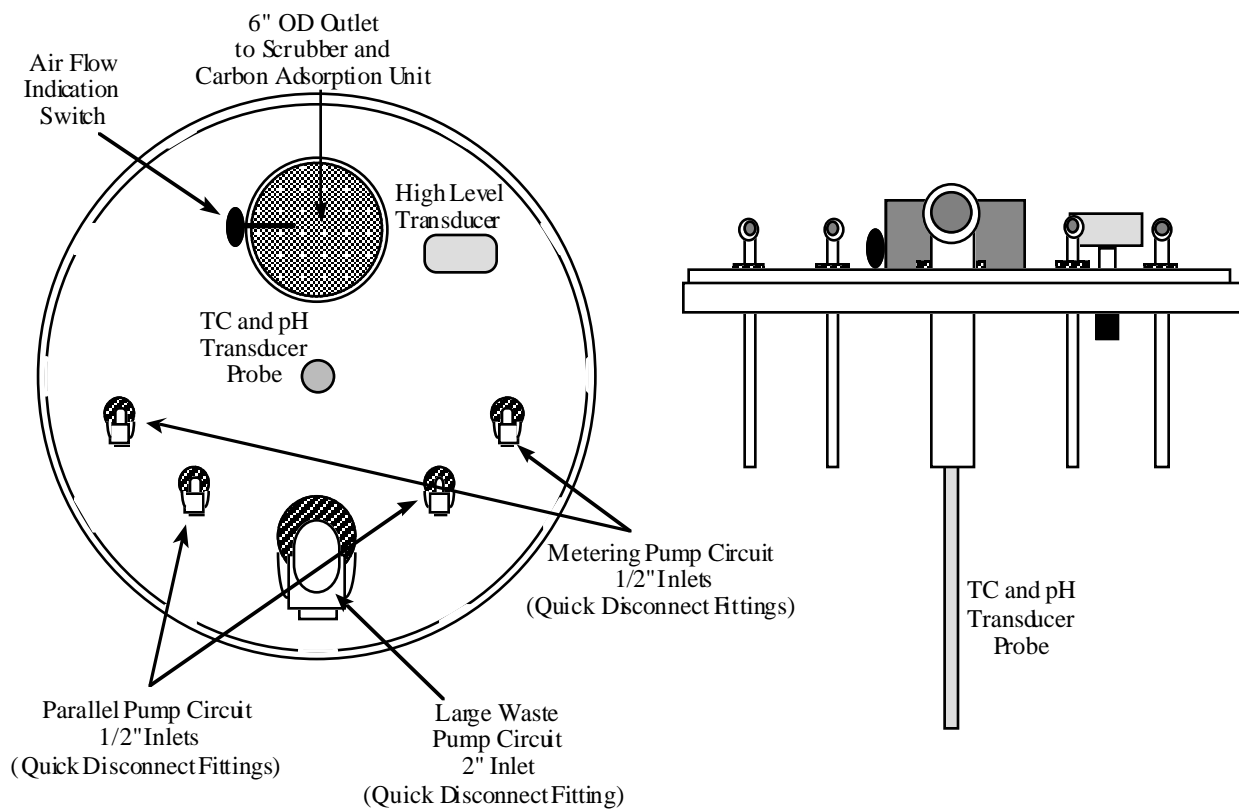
Schematic Detail of the Portable Blending Tank Lid Assembly
